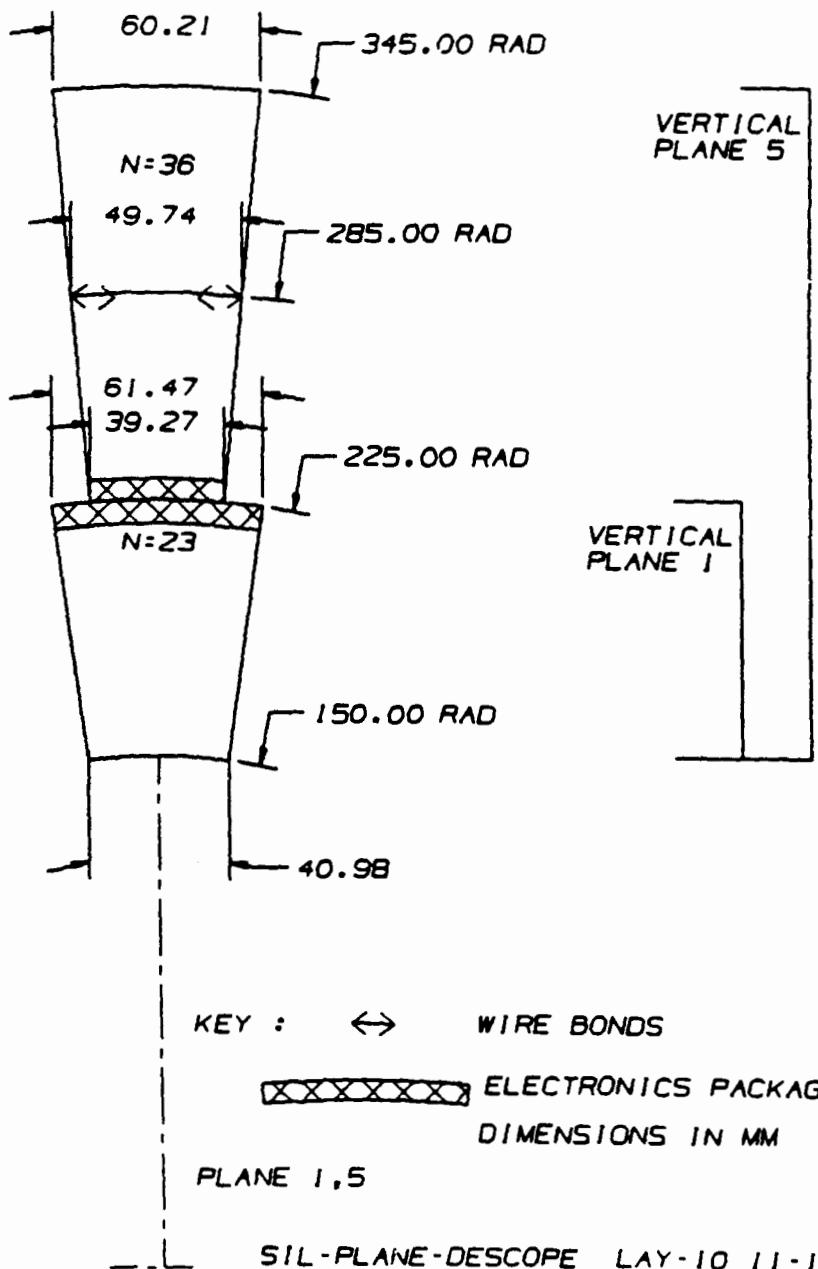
Detail of Detectors on Planes 1 and 5
